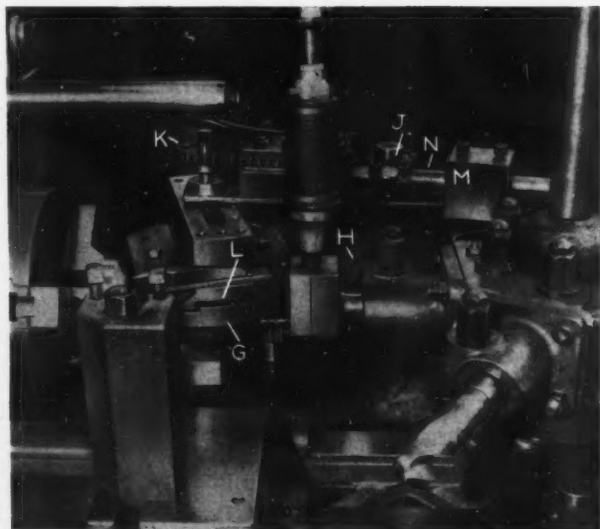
Close-up view of the special taper-turning attachment seen in Fig. 7
